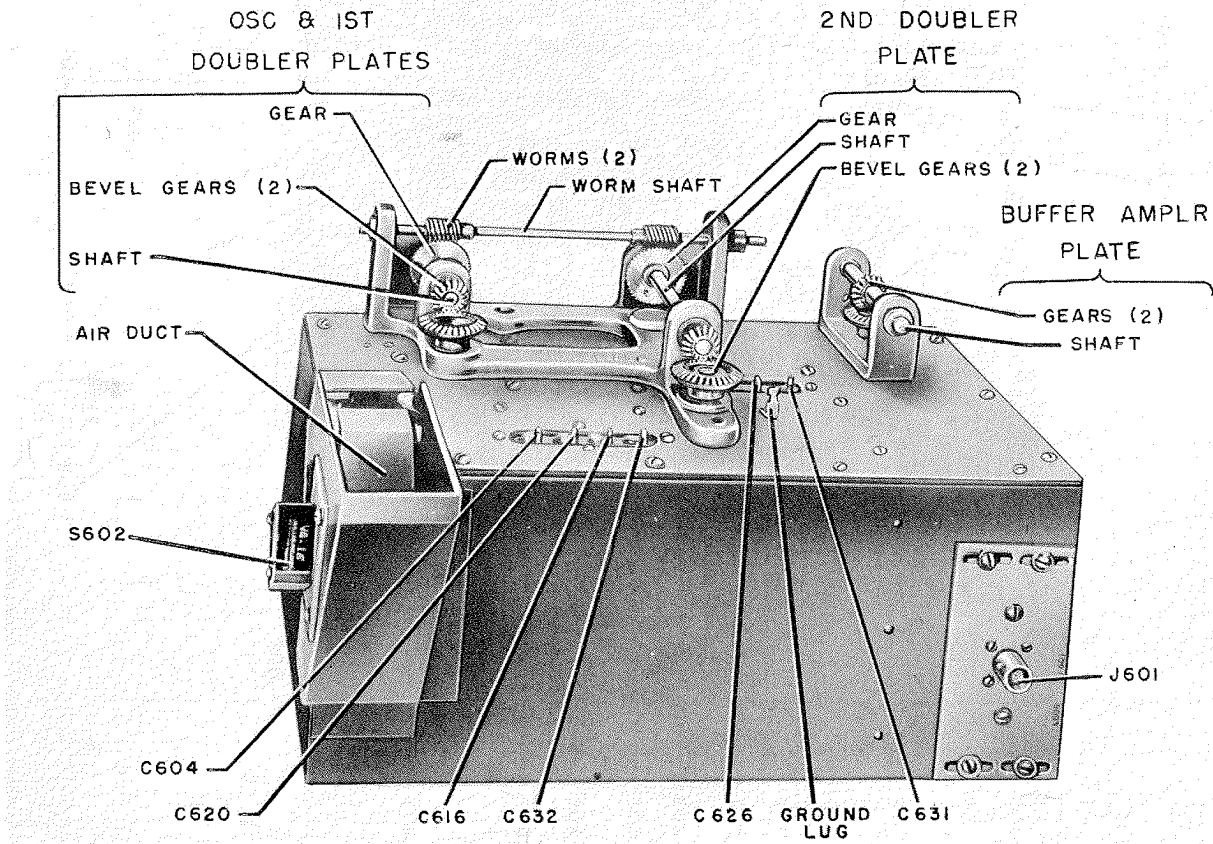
Radio Transmitter, Rear View of Exciter Subassembly After Removal, Parts Location
